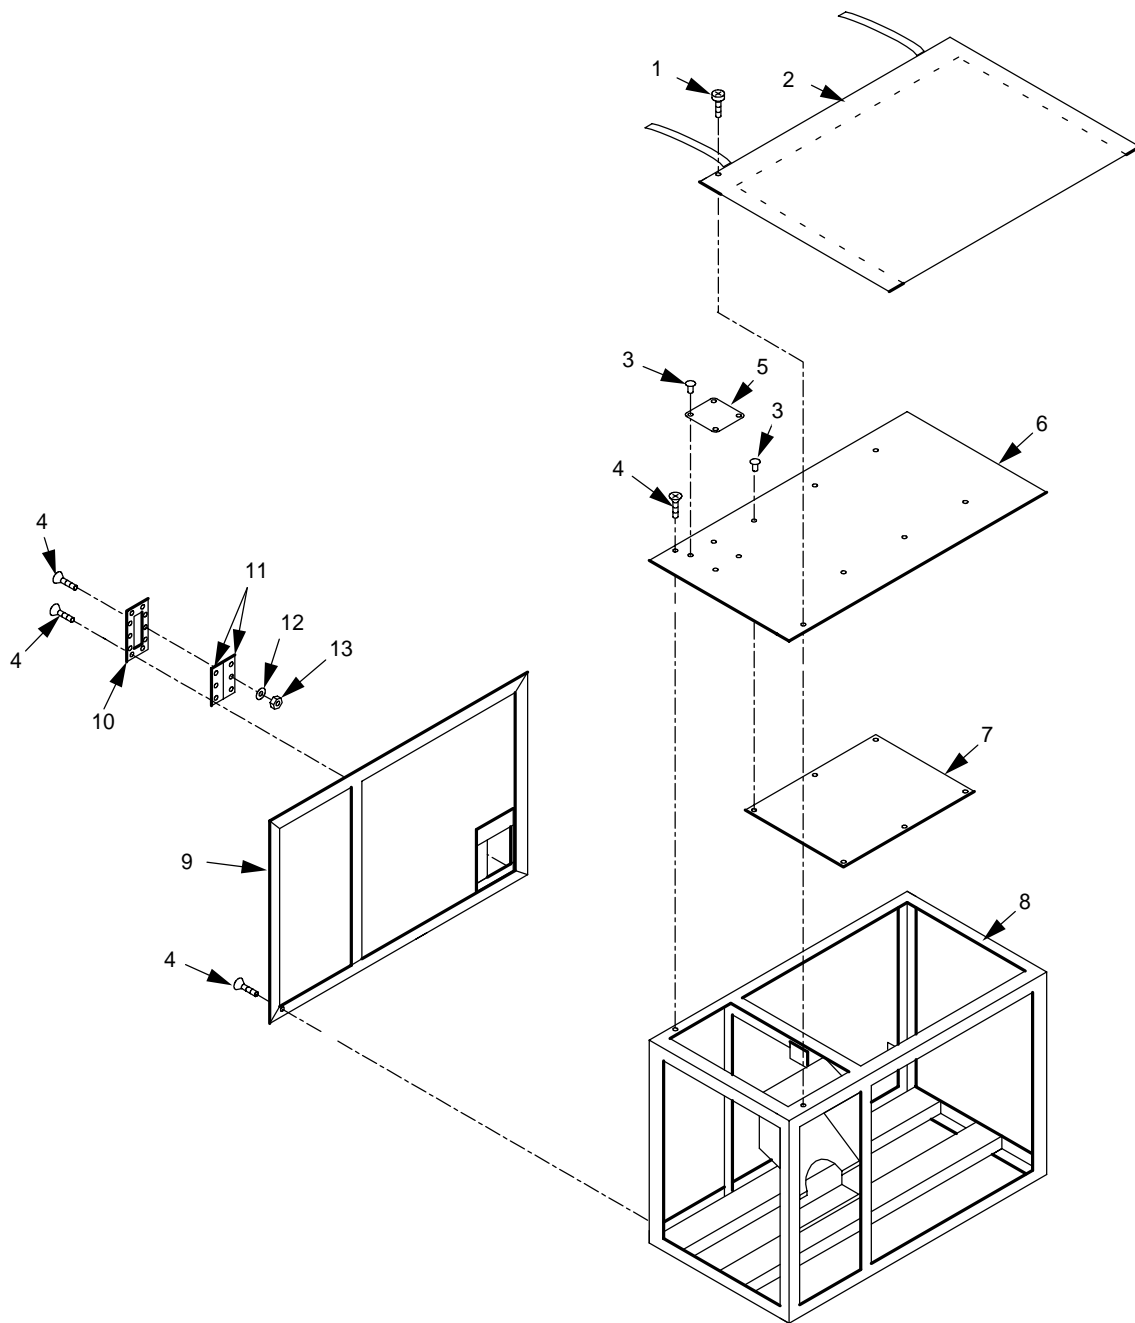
Condenser Assembly (Sheet 1 of 6)
